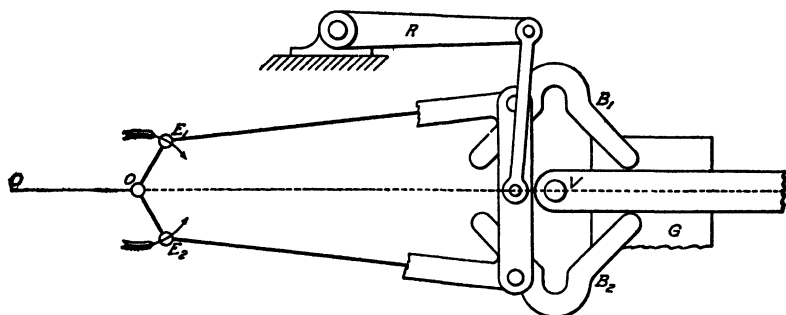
Reversing Device Using Two Eccentrics and Gab-Hooks
